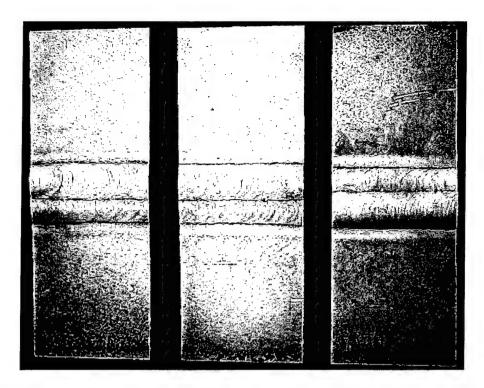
T87-T87 With 2319 Filler Metal Corrosion Specimen After Chemical Cleaning.
